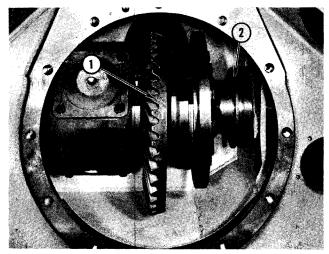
RING GEAR AND RETAINER CAPSCREWS REMOVED 1. Ring Gear 2. Retainer
